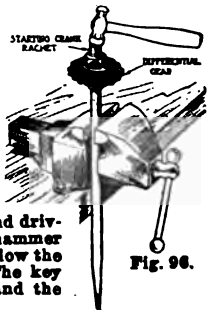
Ford differential gears can be removed from the shafts by placing an old starting crank ratchet in the face of the gear and driving it with a hammer till the gear is below the half-moon key. The key is then removed and the gear driven off.
